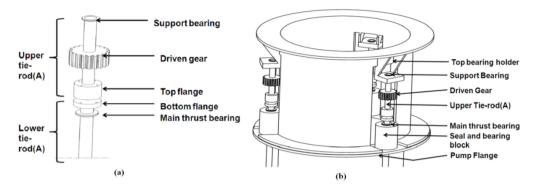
(a) Tie-rod (A) with modified design from handling perspective (b) A Schematic of motor support stand with its components assembled on top of pump flange
